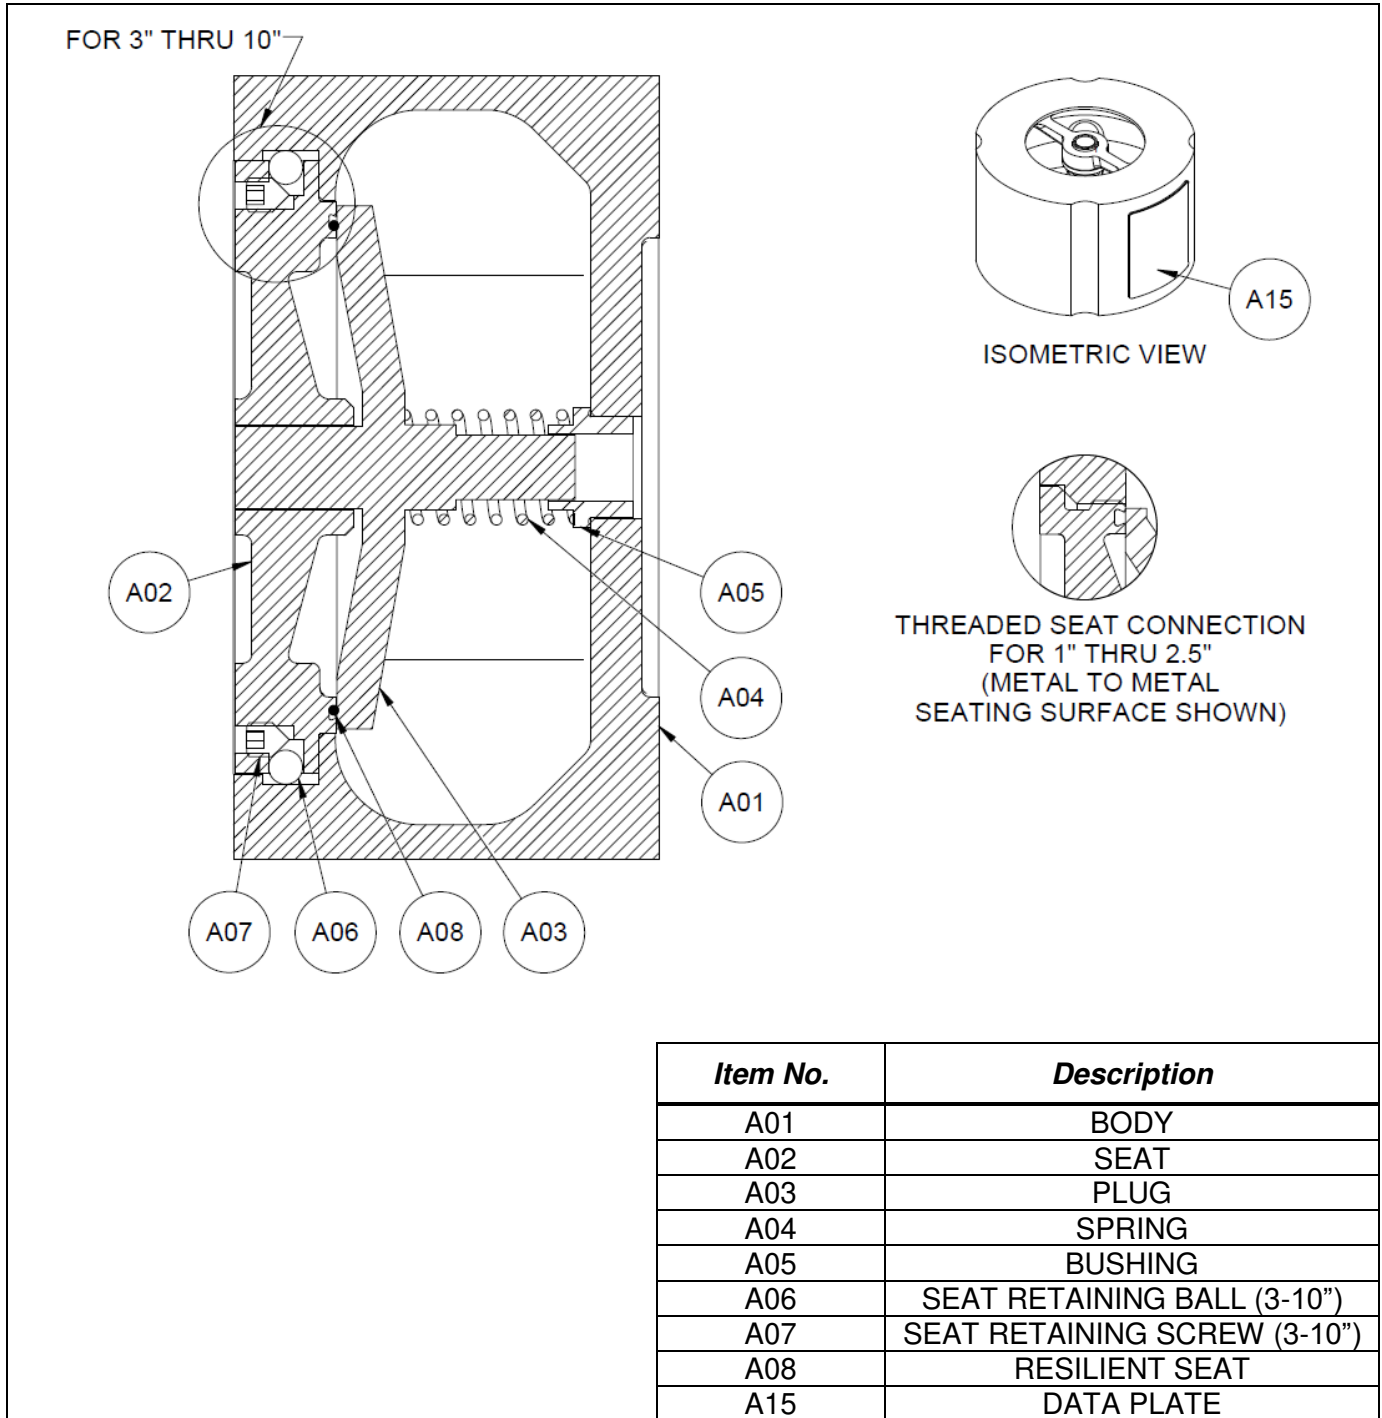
CSC-300A Wafer Style Silent Check Valve (2D Cross Section)
